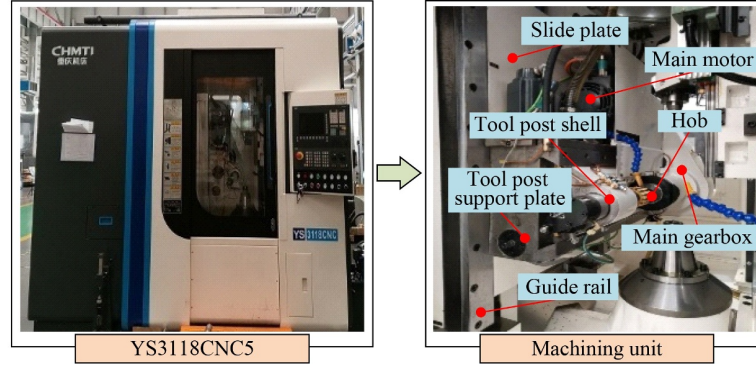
YS3118CNC5 hobbing machine tool and its machining unit.
